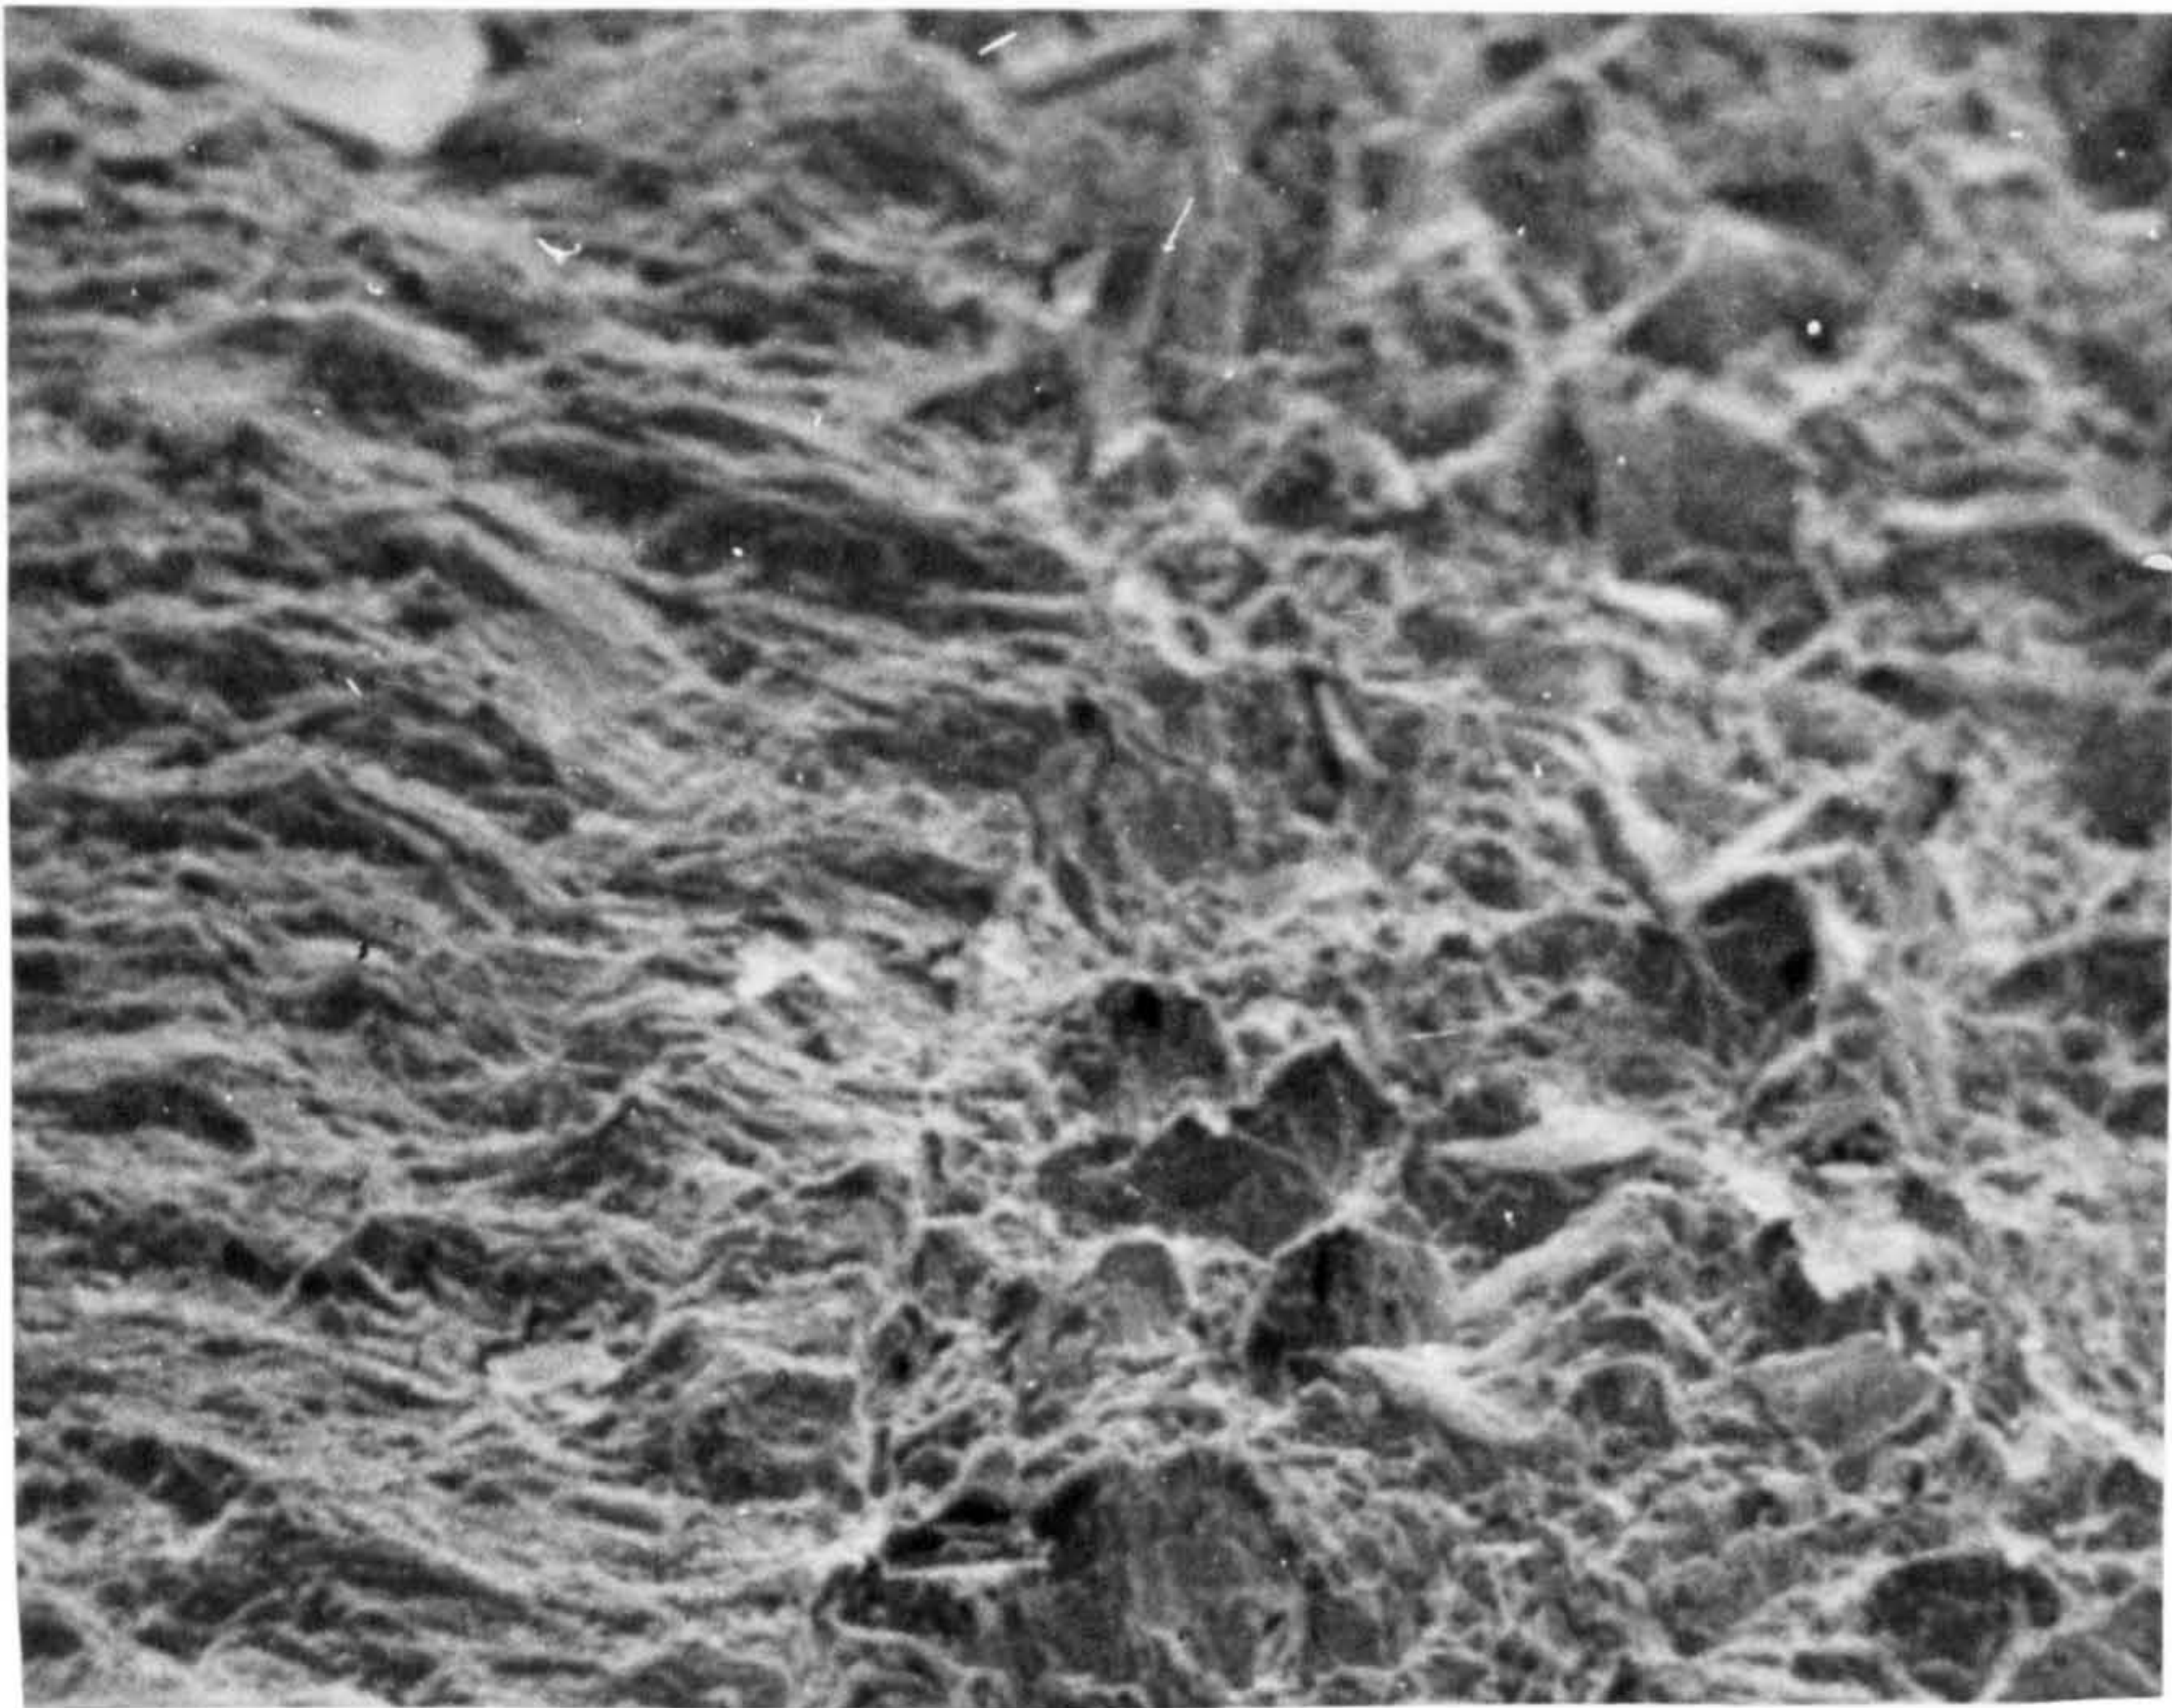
Fracture surface showing the pre-crack and stress corrosion areas. (200x)
